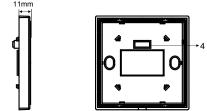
Dimensions - Side View Figure 9. Components - Back View
